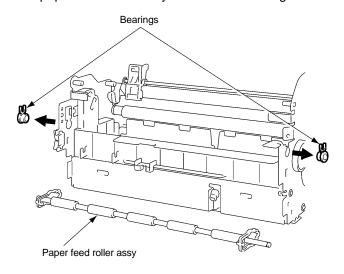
Removing the Paper Feed Roller Assy (2)
